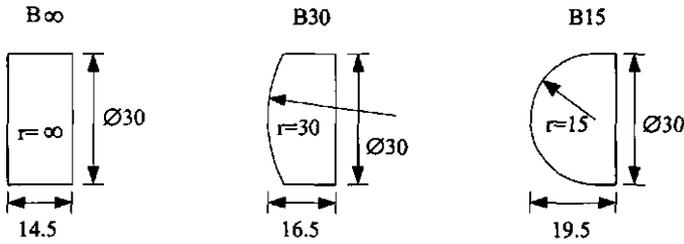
Schematic drawing of the impact bodies (dimensions in mm).
